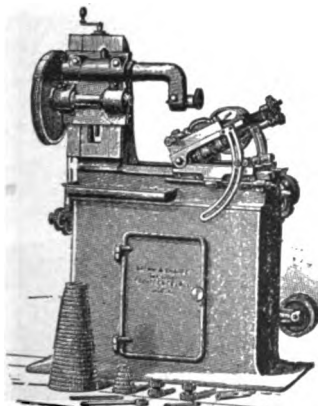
BROWN & SHARPE AUTOMATIC GEAR CUTTING MACHINE.
